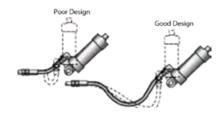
When routing hose, care must be given to note all areas that have movement and how the hose will move. No part of the system movement should cause the hose bend radius to be exceeded or cause undue stress at the crimp joint.
